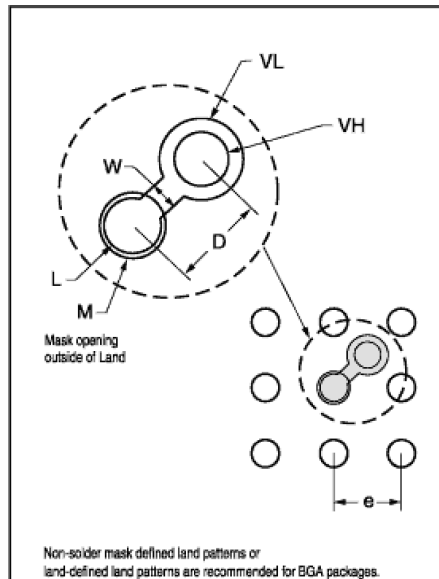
Suggested Board Layout of Soldered Pads for BGA Packages(1)
